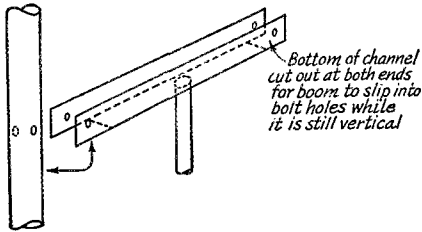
At W6VFR, the mounting plate is made from a length of "U"-channel iron cut and drilled as shown. The boom is raised vertically until one set of bolt holes is in line and a bolt is slipped through. The boom is then swung into its horizontal position and the other bolt is put in place.
